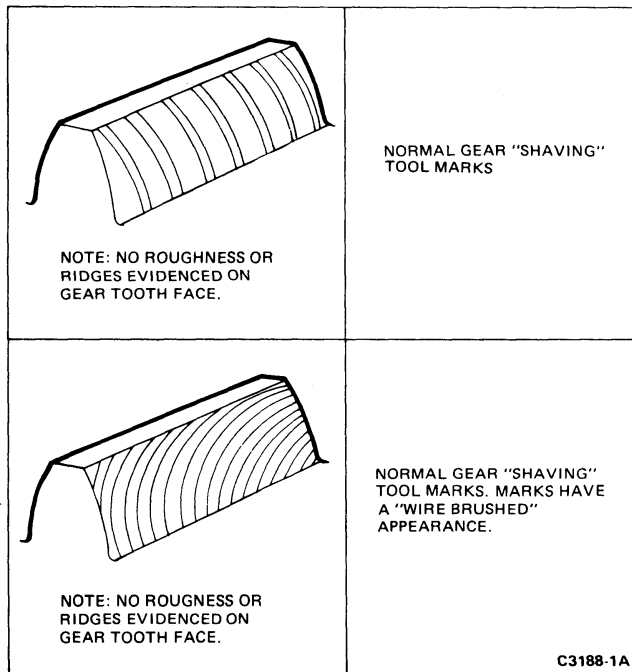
Normal Tool Marks—Four-Speed Transmission Gear Teeth—F-100—F-350, Bronco
